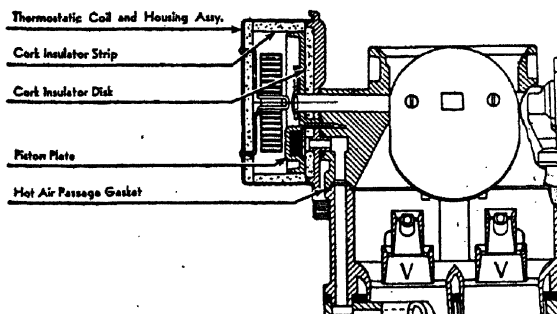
Sectional view through Head of Carter Carburettor of Twin Venturi Type, showing (on left) thermostatic control acting directly on air choke butterfly valve. The twin venturi tubes are shown at V.
